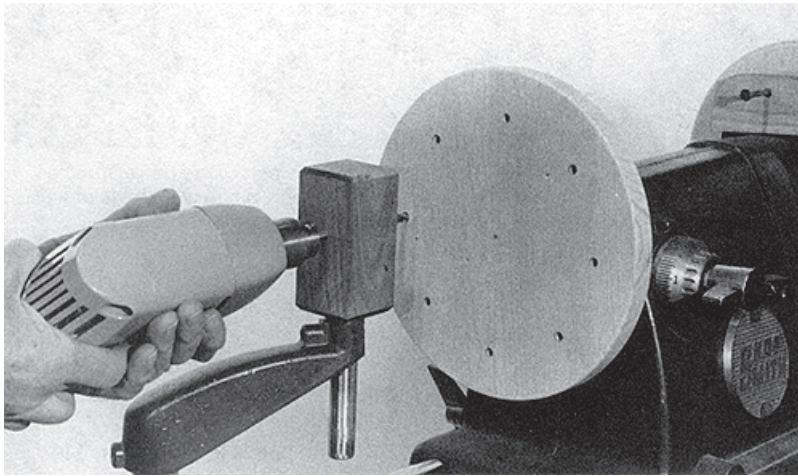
A typical application for the indexing device. It positions work so radial holes can be equally and automatically spaced. The drill guide keeps the bit square to the workpiece.
